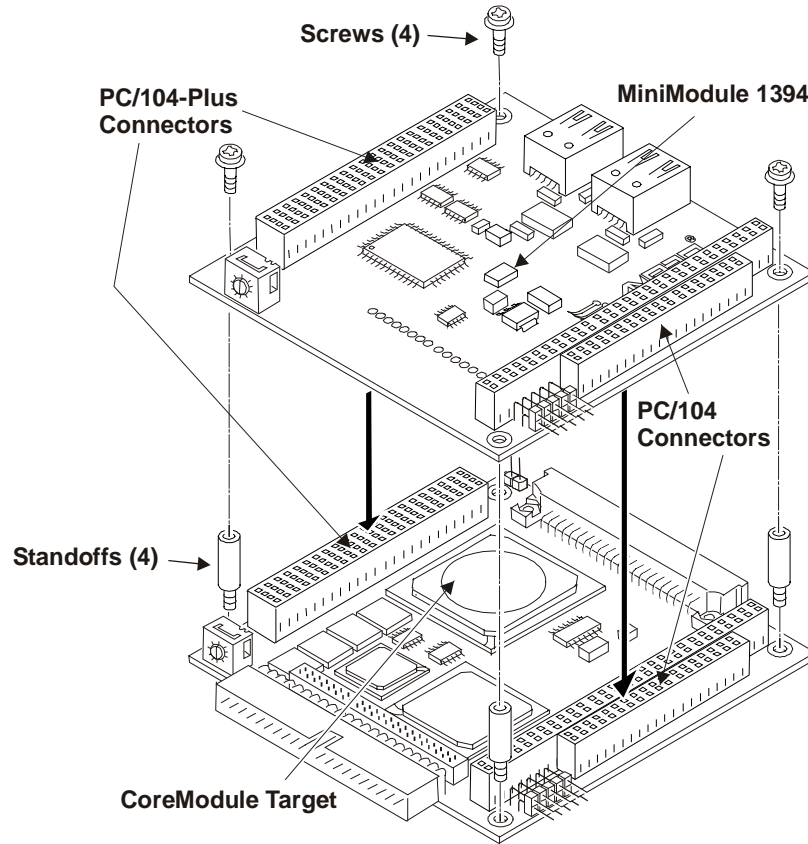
Installing MiniModule 1394 on CoreModule Target
